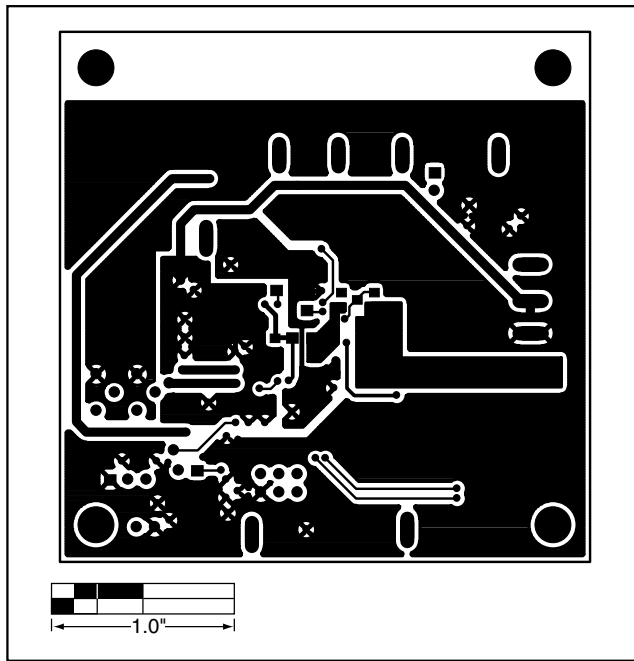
MAX1772 EV Kit PC Board Layout—Solder Side
